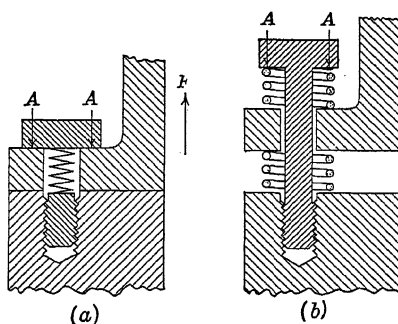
Cap screw securing flange in place. Springs represent the elasticity of (a) the cap screw and (b) the flange.
